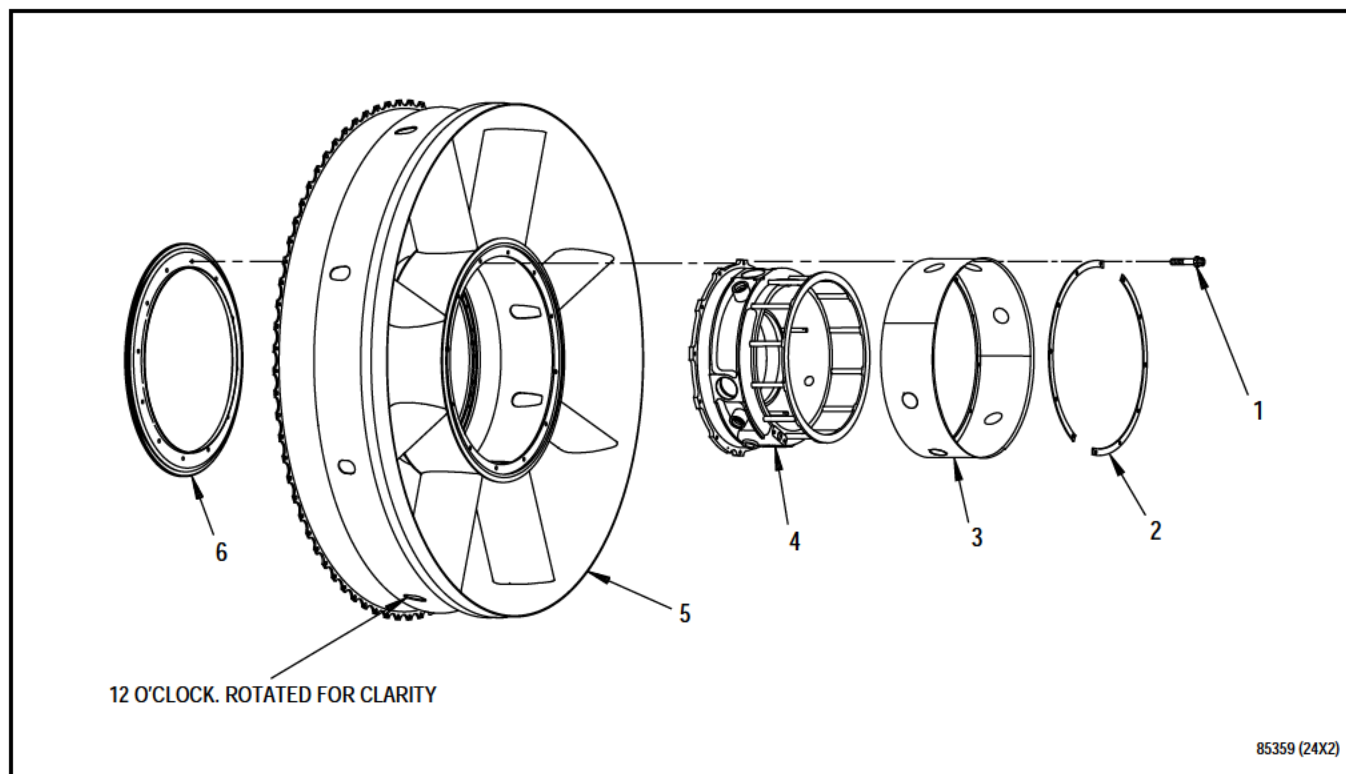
Fourth Stage Turbine Brush Seal and Support Assembly and No. 5 Bearing Seal Assembly - Installation
